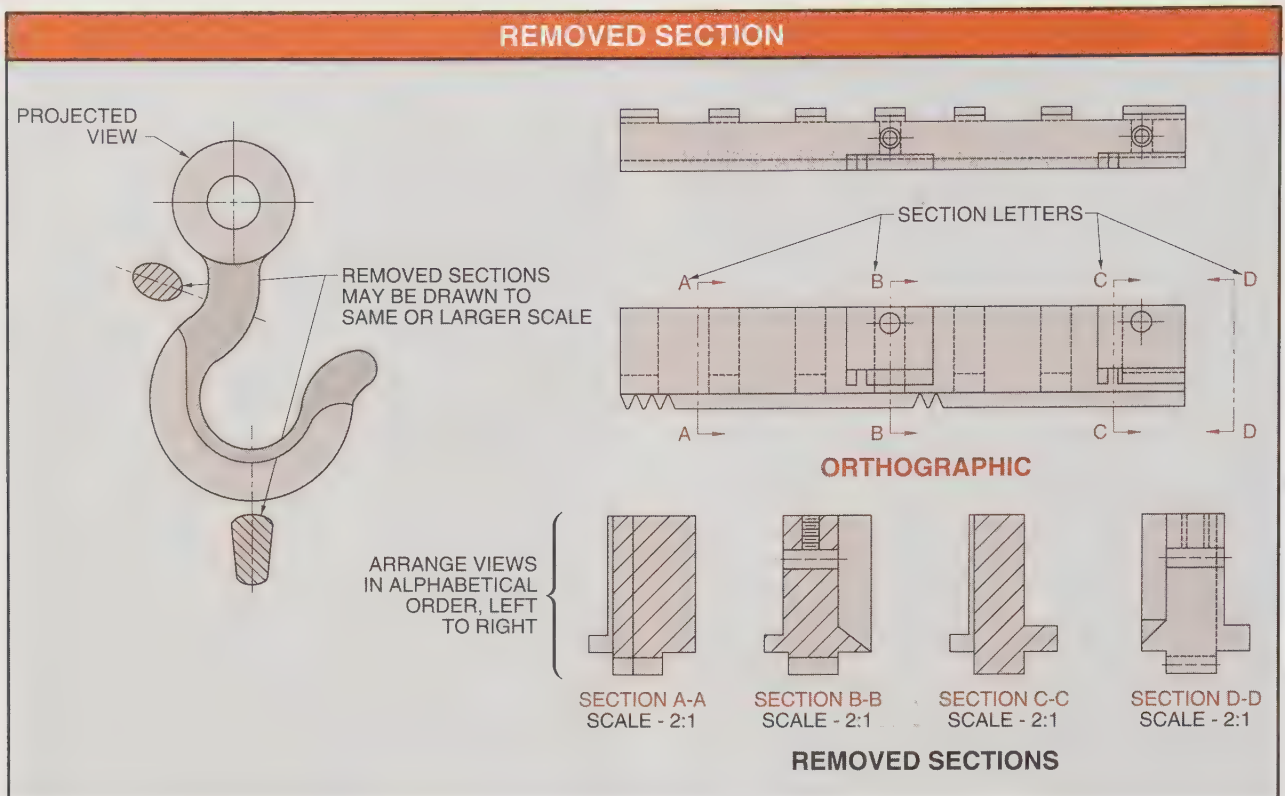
A removed section is a sectional view that is detached from the projected view.
